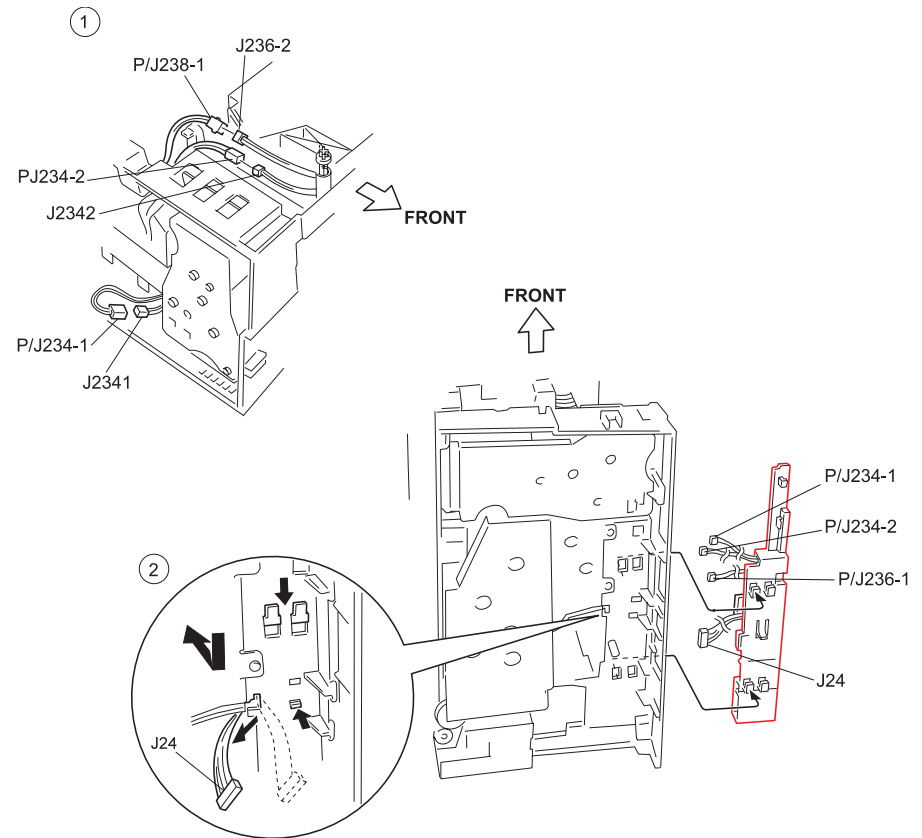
"Sensor Assembly Size 1,E" Removal
